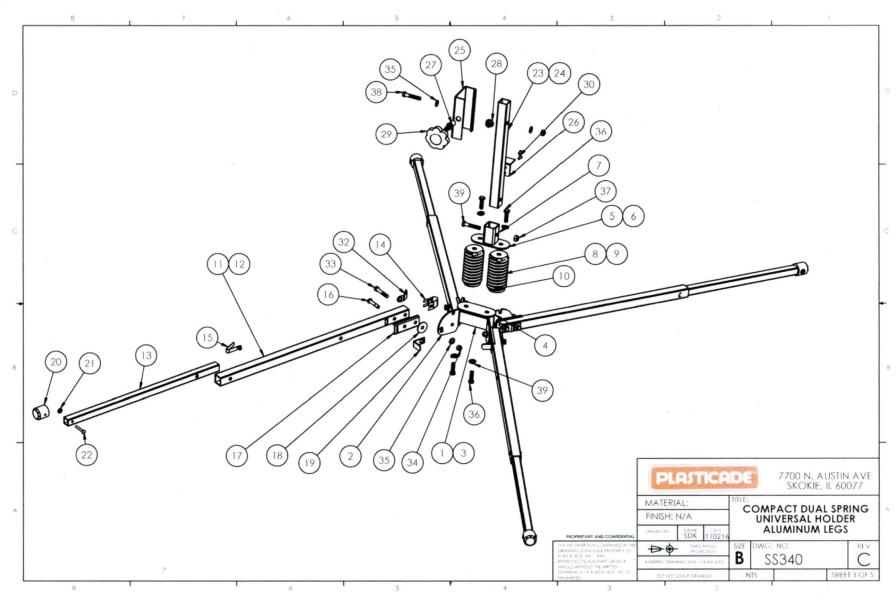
Plasticade® SS340 Technical Drawing (Sheet 3 of 5)
